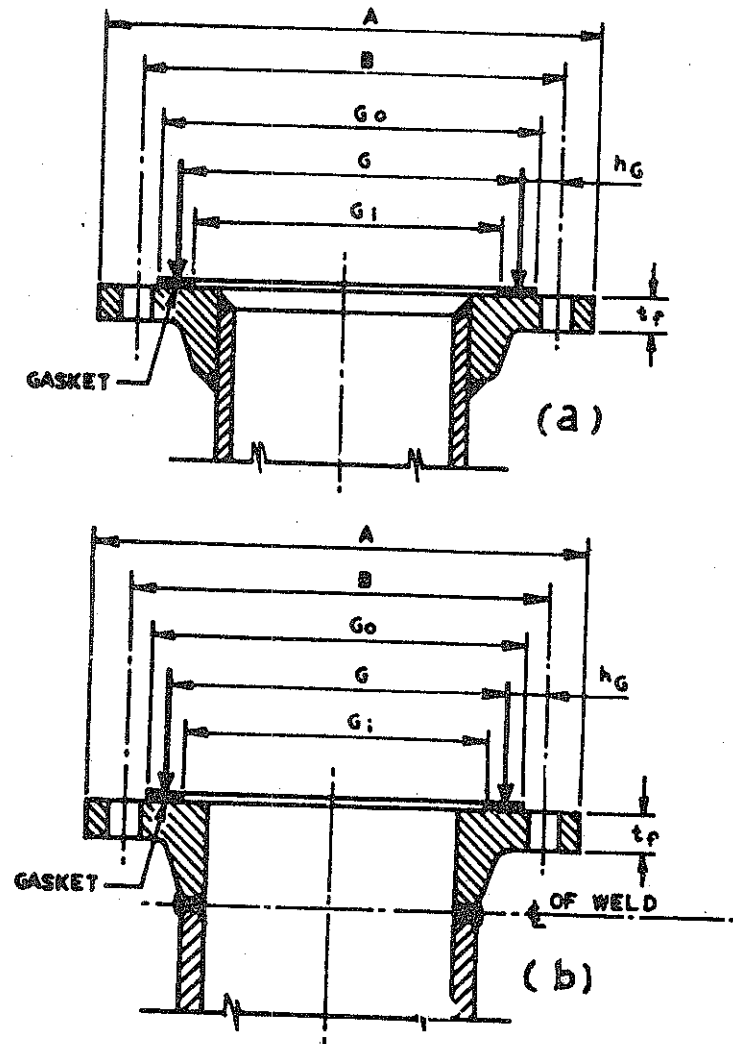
Flange dimensions (a) lap welded (b) butt welded
